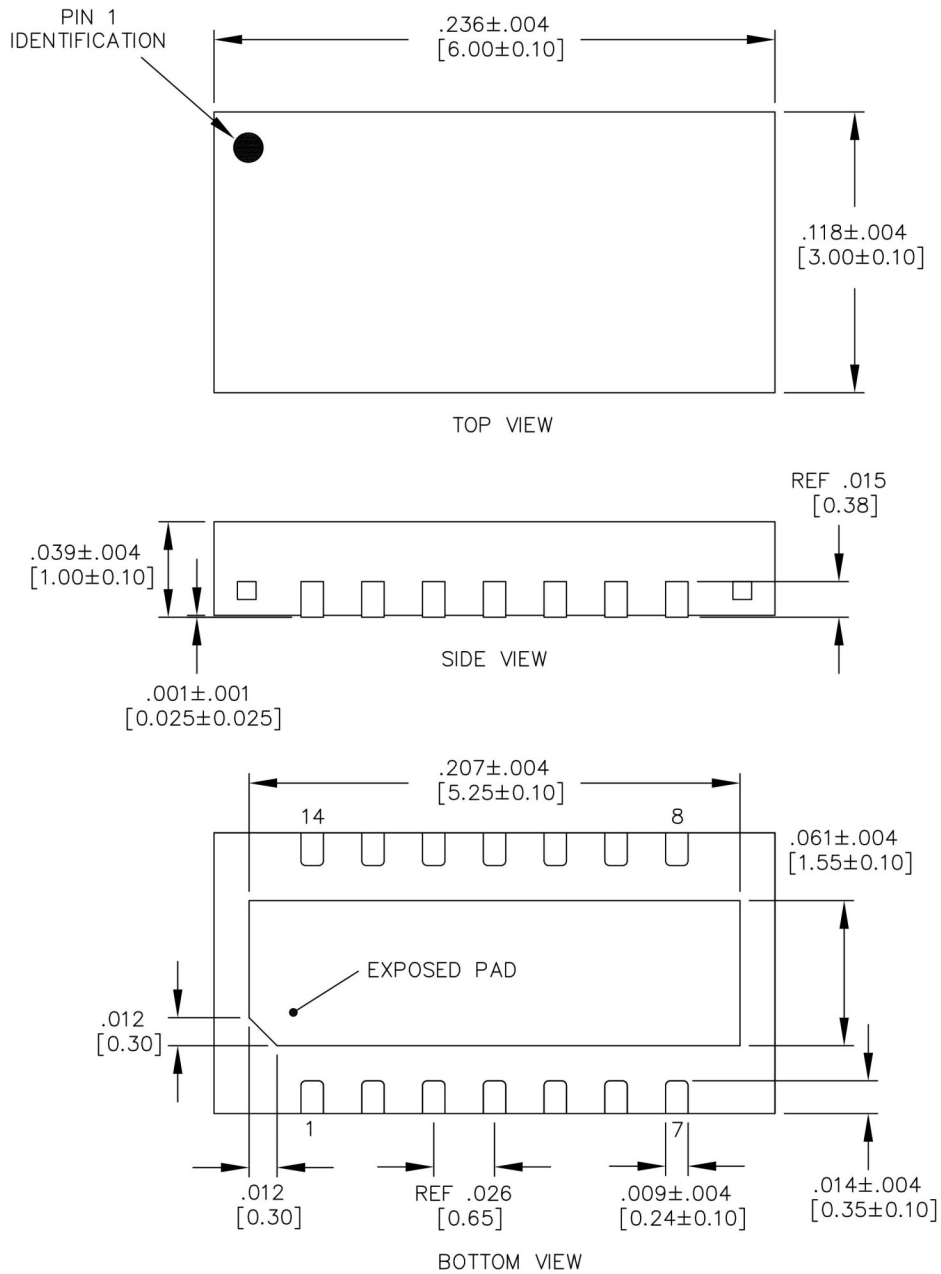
DFN3X6-14 Plastic Package Dimensions (all dimensions in inches [millimeters])
